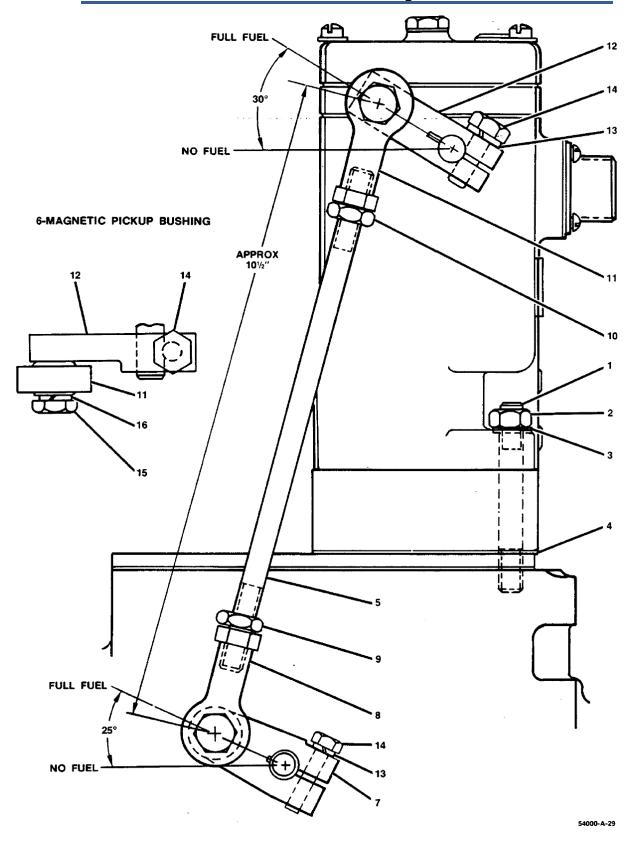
Linkage Arrangement and Setup for Installing the EG-3P Actuator
